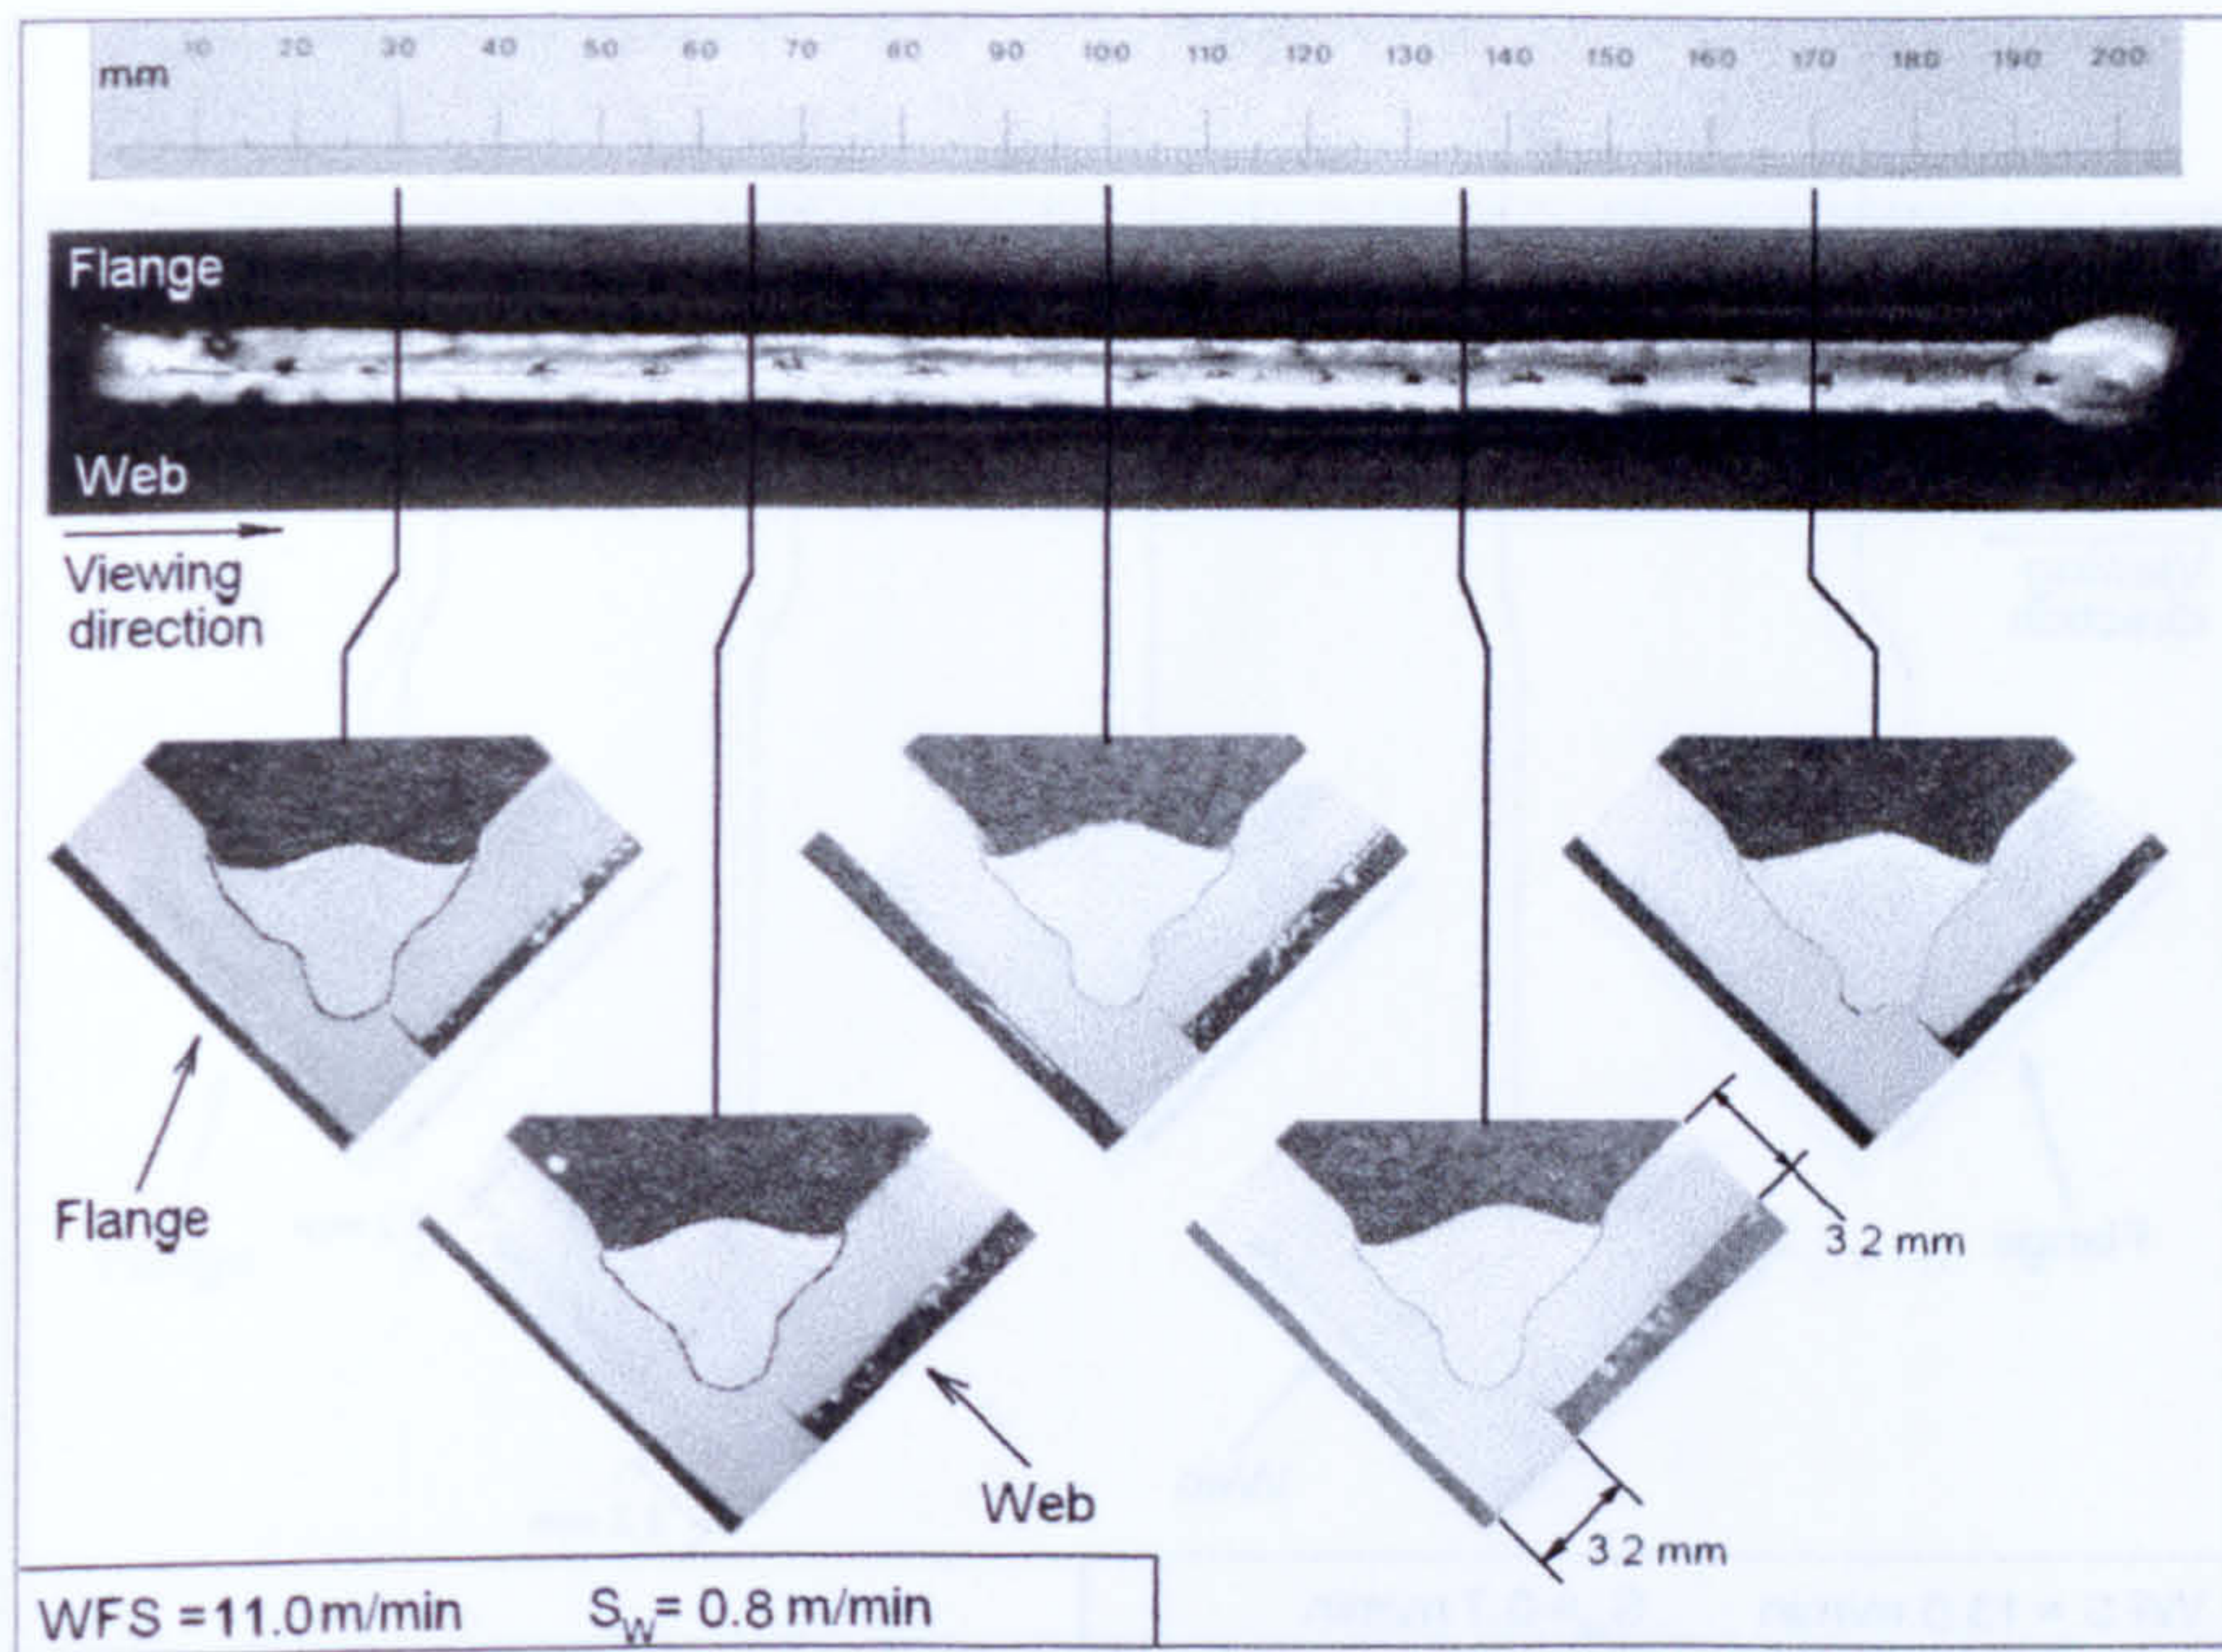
Bead appearance and bead profiles along the weld for the voltage and stand-off controlled welding trial SV4.
